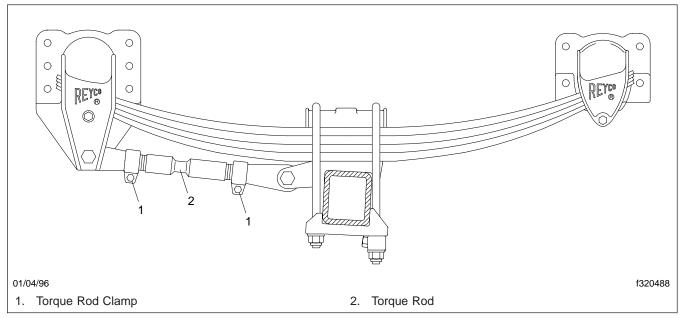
, Reyco 79KB Torque Rod Clamp Position
